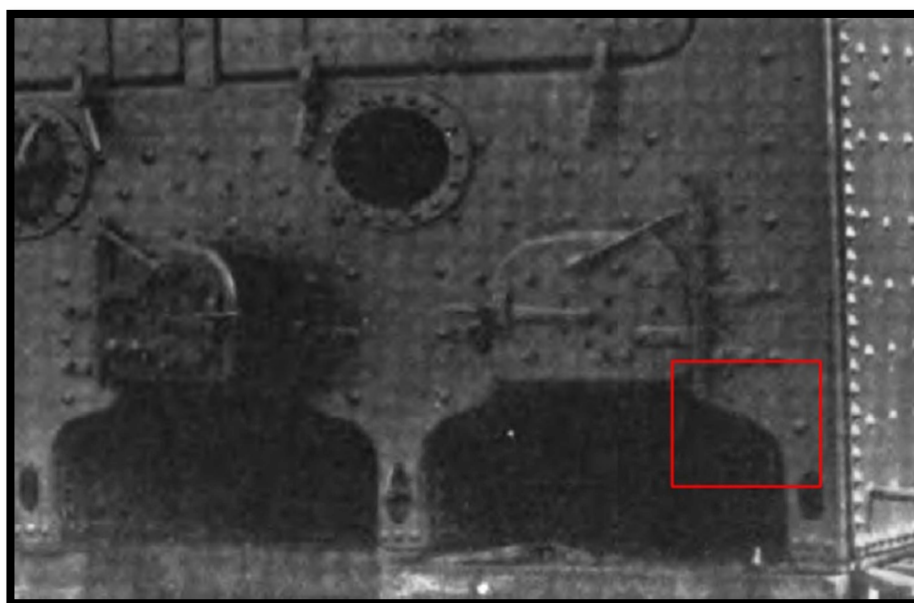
TRANSITION PLATE BETWEEN LOWER ASH PIT AND UPPER FIRE DOOR FRAME (UNIDENTIFIED 1902:523)
